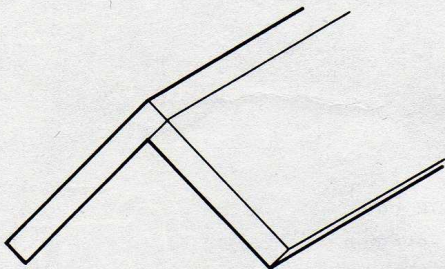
Closed corner joint. Penetration impossible. Will require weld in the inside for full strength.
